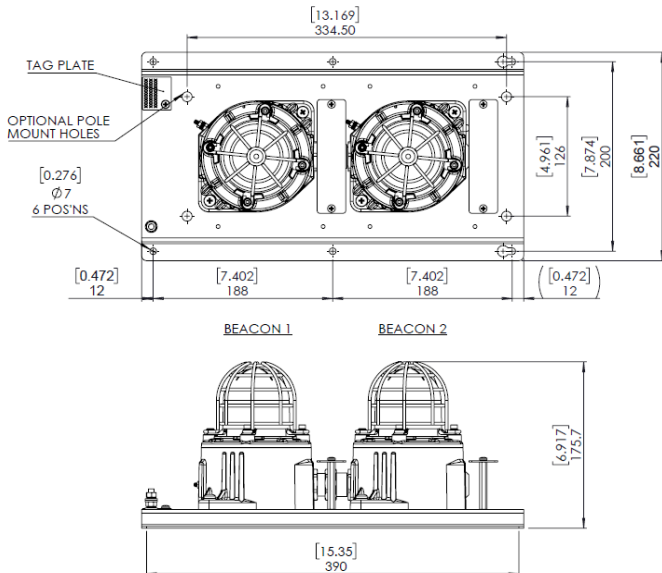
Mounting Detail and Dimensions for GNEx Stack
